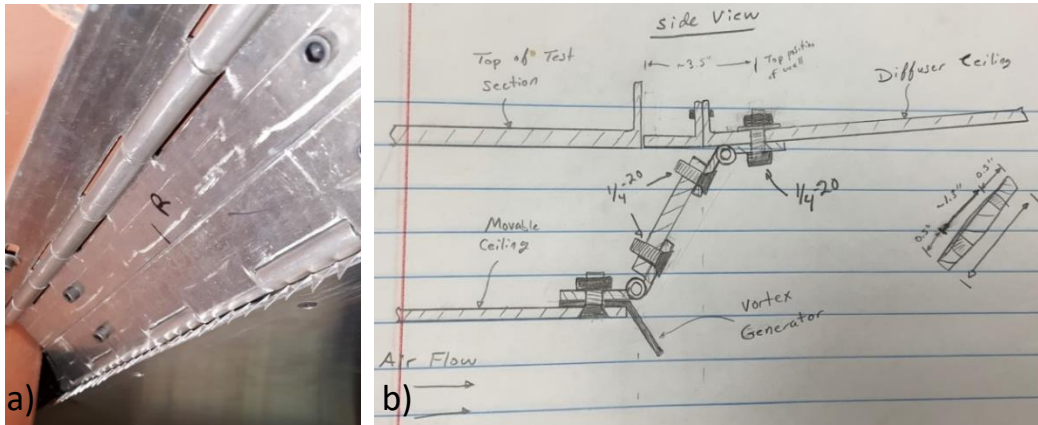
Photograph a) and schematic b) of the diffuser hinged assembly transition piece.
